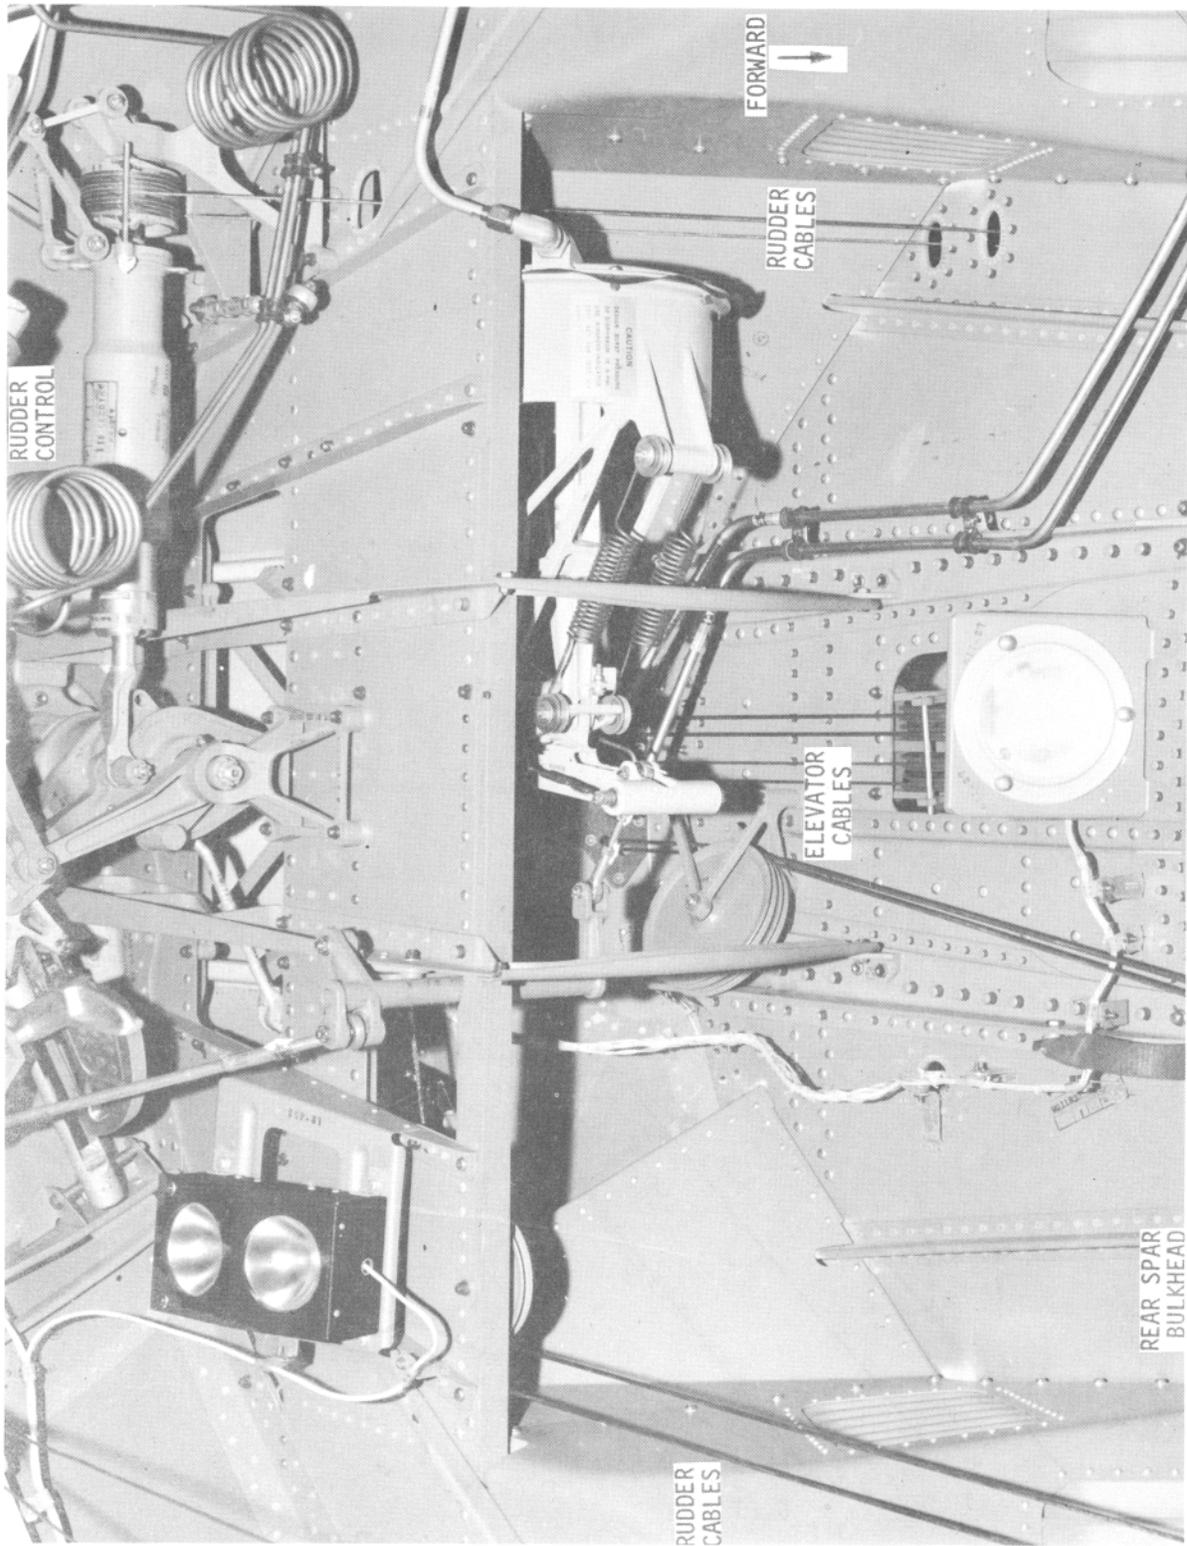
VIEW FROM TAIL CONE ACCESS DOOR LOOKING UP AND FORWARD
